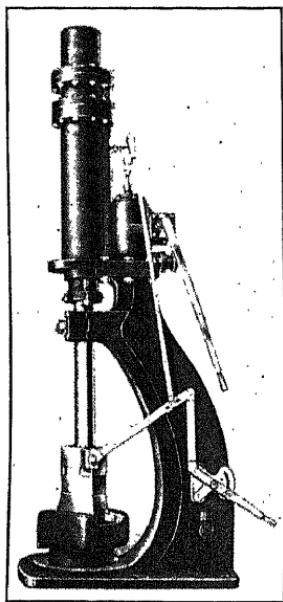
Steam hammer. Buffalo Foundry & Machine Co., Buffalo.
